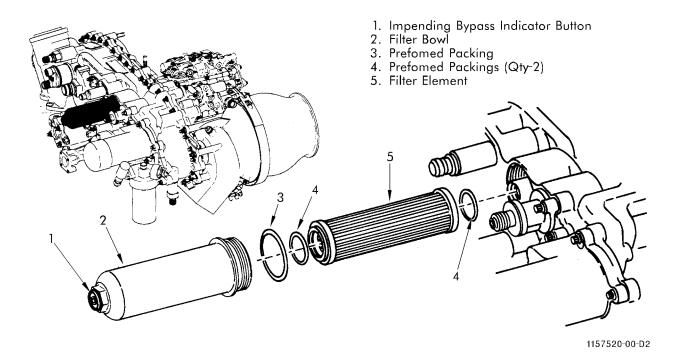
Oil Filter and Bowl; Removal and Installation
